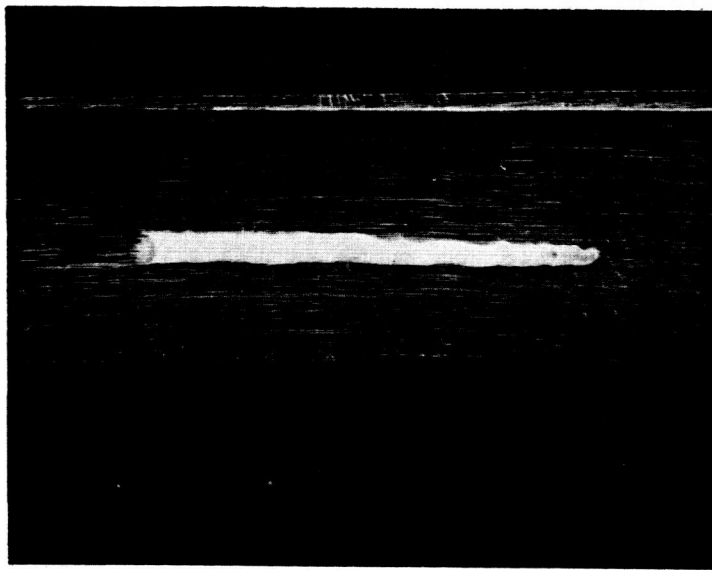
Photomacrograph of AZ31 Magnesium seam weld. Weld schedule: 1.99 volts, 20 lbs. pressure, 30 inches/minute speed.
